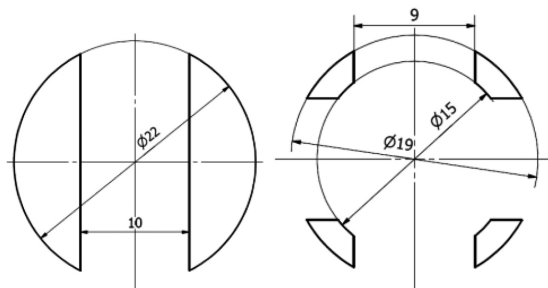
Specimens' contact surfaces: version 1 – left, version 2 – right
